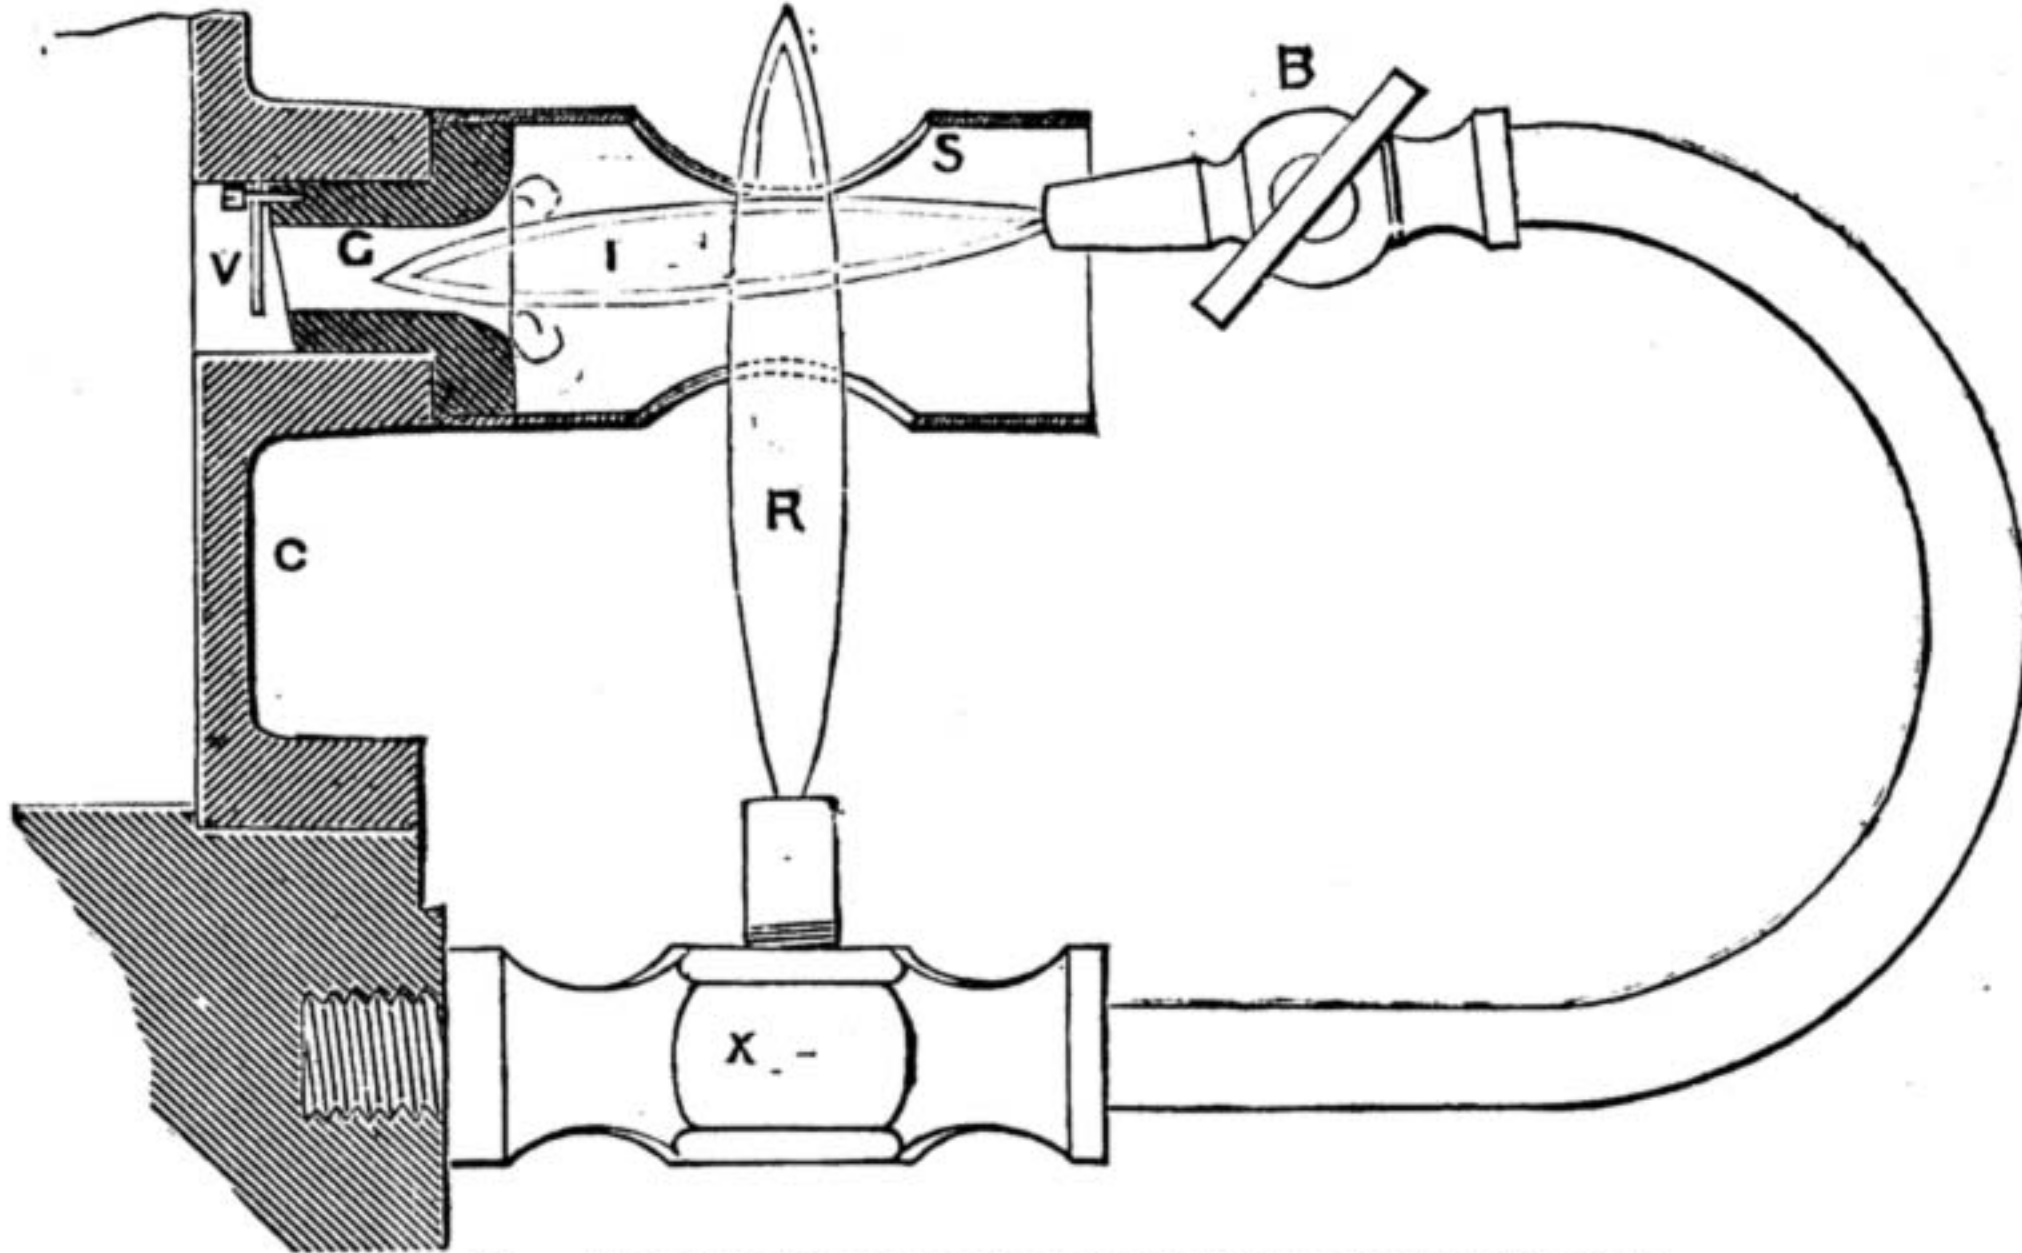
Arrangement of Ignition of Small Gas-Engine.
